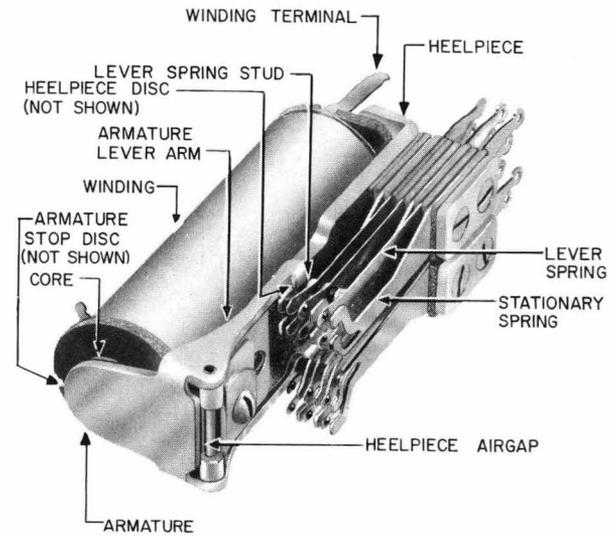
Fig. C — Relay With Bifurcated Contact Springs — Used in Control Unit
